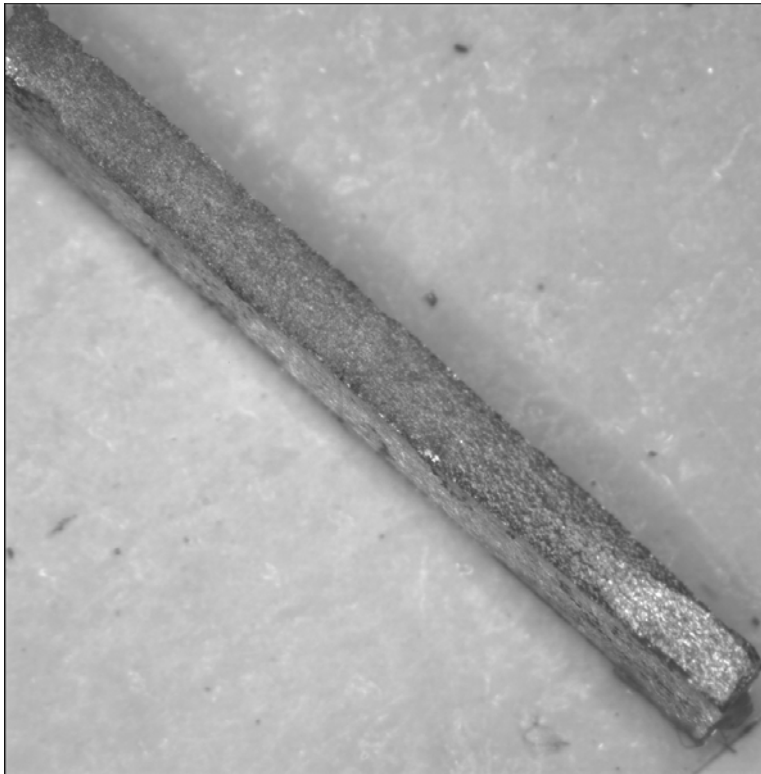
Fracture Surface of Specimen 5880.
